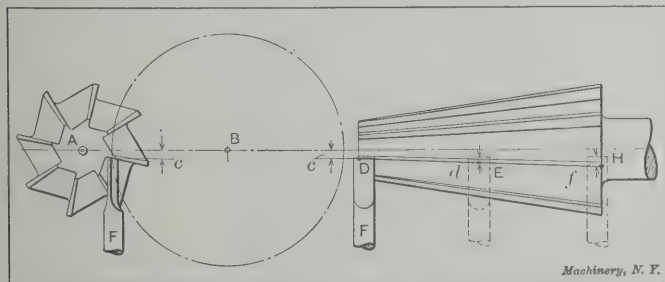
Illustration showing Conditions when Grinding a Taper Reamer by Method shown in Fig. 1
